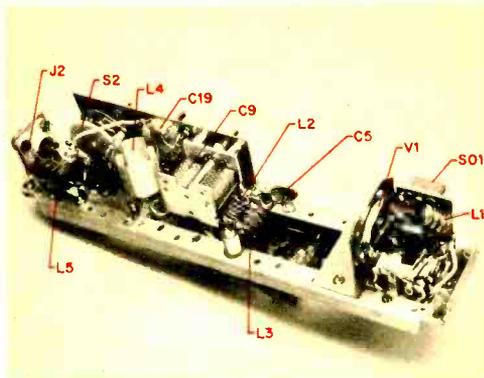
Transmitter. Make a bracket 5-in. wide and install it on front of chassis to support S2. C9 and C19. Coil L4 is mounted with small bracket.
